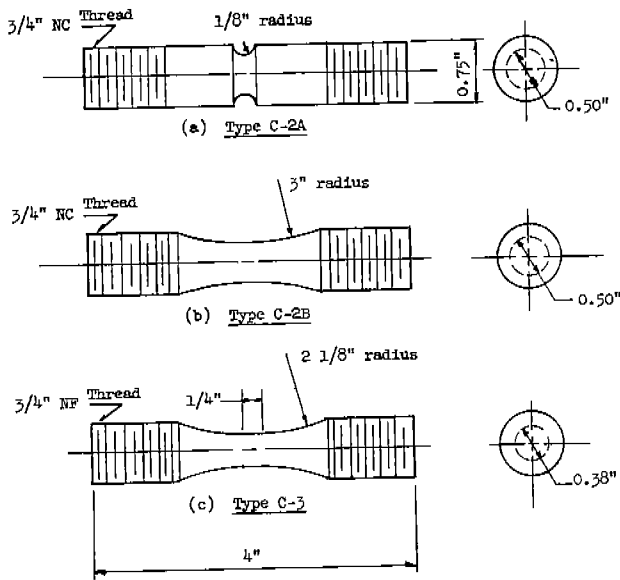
DETAILS OF TYPES C-2A, C-2B AND C-3 SPECIMENS.
